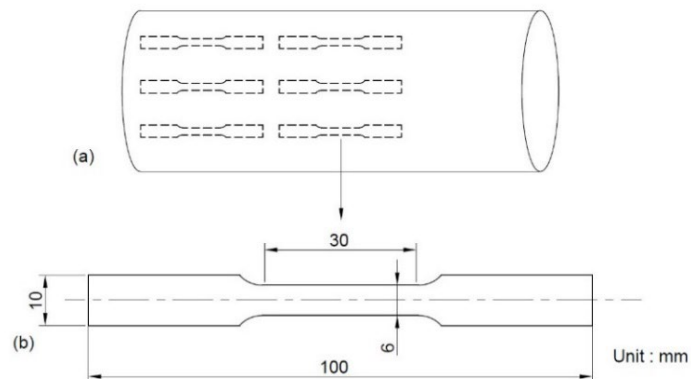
The cutting position of the specimen for tensile testing (a); and (b) the specimen dimensions for tensile testing.
